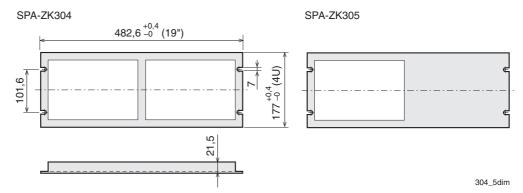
Mounting cabinets and frames (dimensions in mm)
